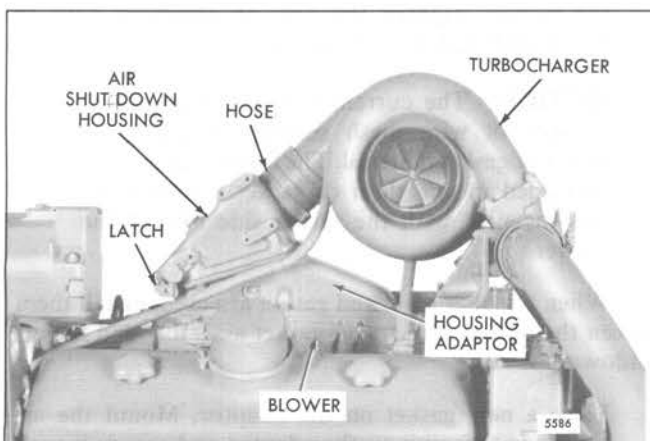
Typical Air Shutdown Housing Mounting (Turbocharged Engine)
